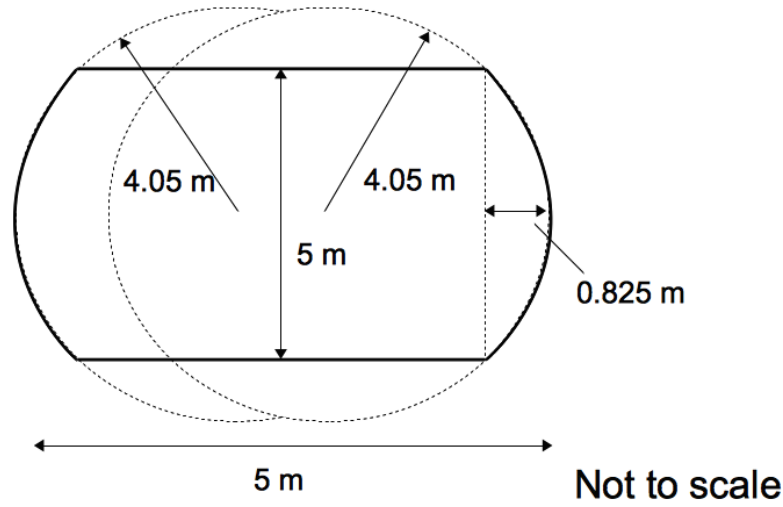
The basic sketch of the side view of the pressure vessel with dimensions in meters. The bold lines indicate the implemented volume. The drawing is not to scale.
